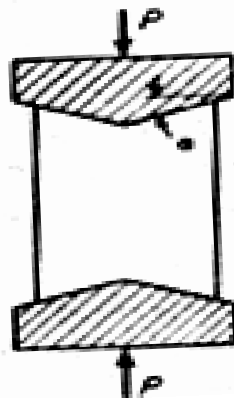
Method developed in Kaiser Wilhelm for producing uniform compression on cylindrical specimen.
